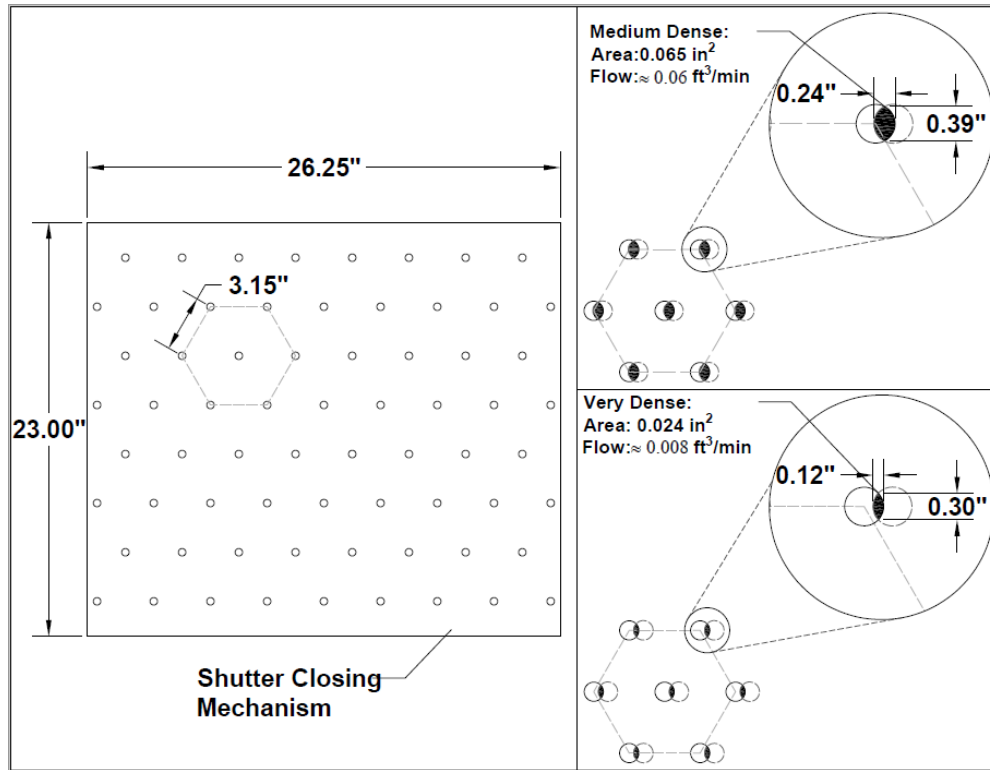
Shutter closing mechanism 3.15-inch spacing
